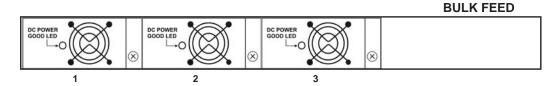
Front View without Breakers or GMT Fuses (configuration C)
